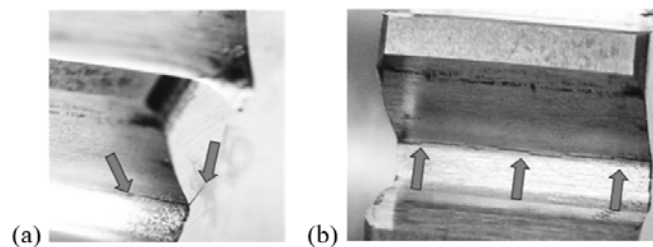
Mechanical gear fractures induced. (a) Example of one of the fractures at the corner base of a gear tooth, fault Fa . (b) Example of one of the fractures along the base of a gear tooth, fault Fb .
